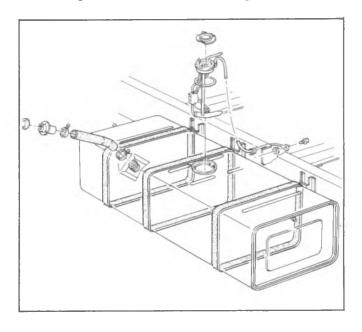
C-72--Fuel Tank (50 Gal.) Meter and Filler Neck - P30
